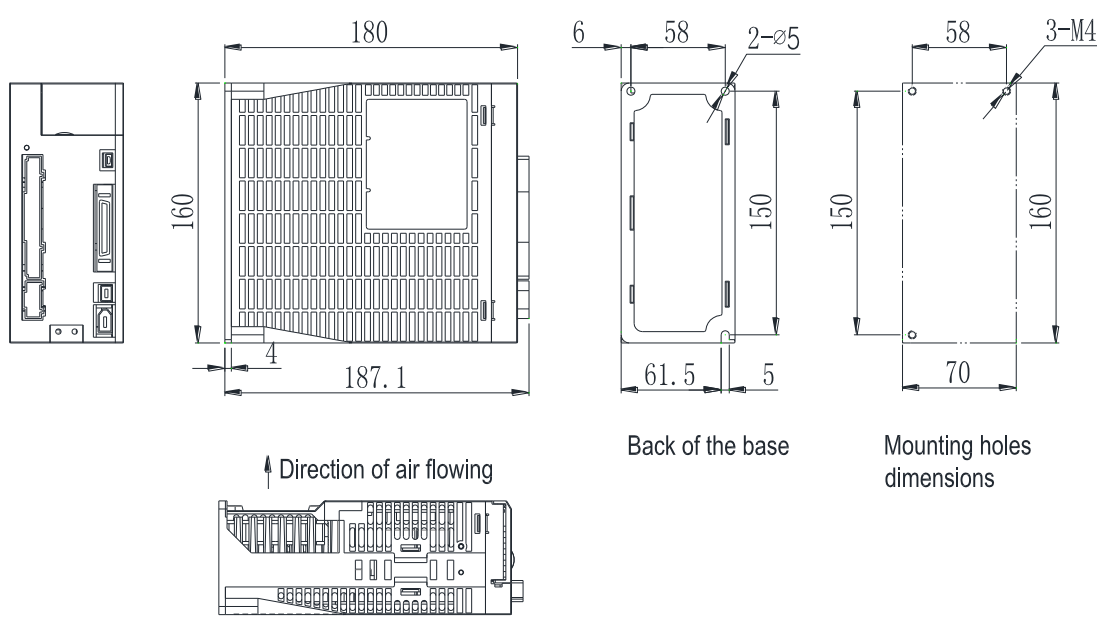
Dimensional drawing of driver WSDV-5R0 and WSDV-6R8
